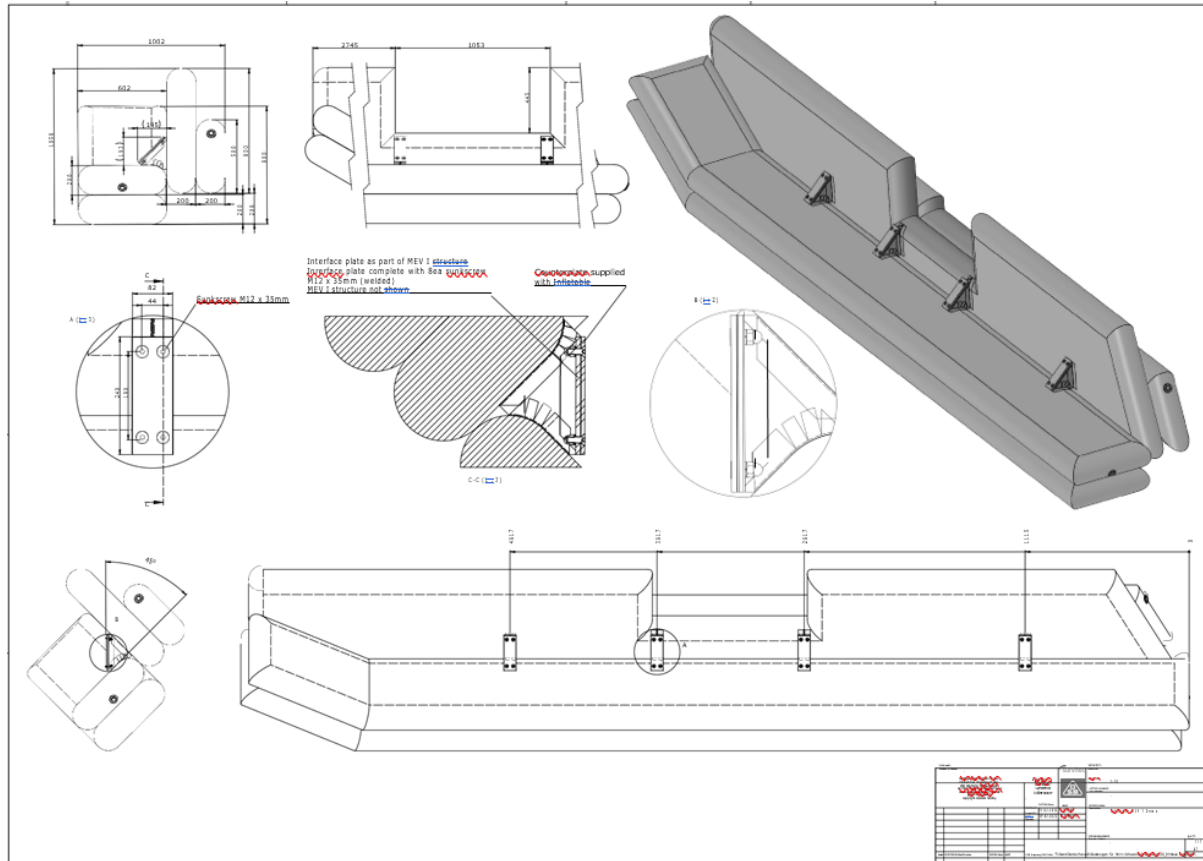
MEV-I Demo - GA Drawing Fitting of the Inflatable (revised)
